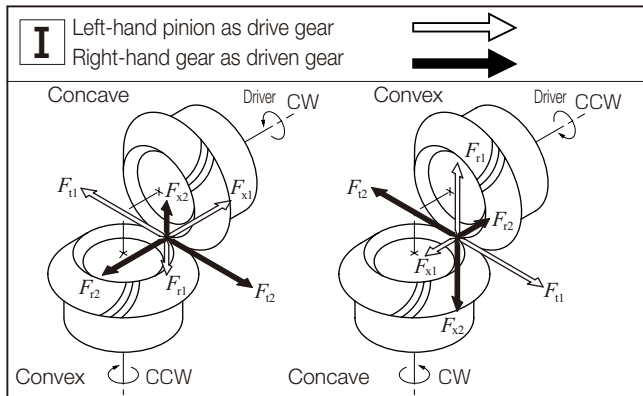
Convex surface and concave surface of a spiral bevel gear
